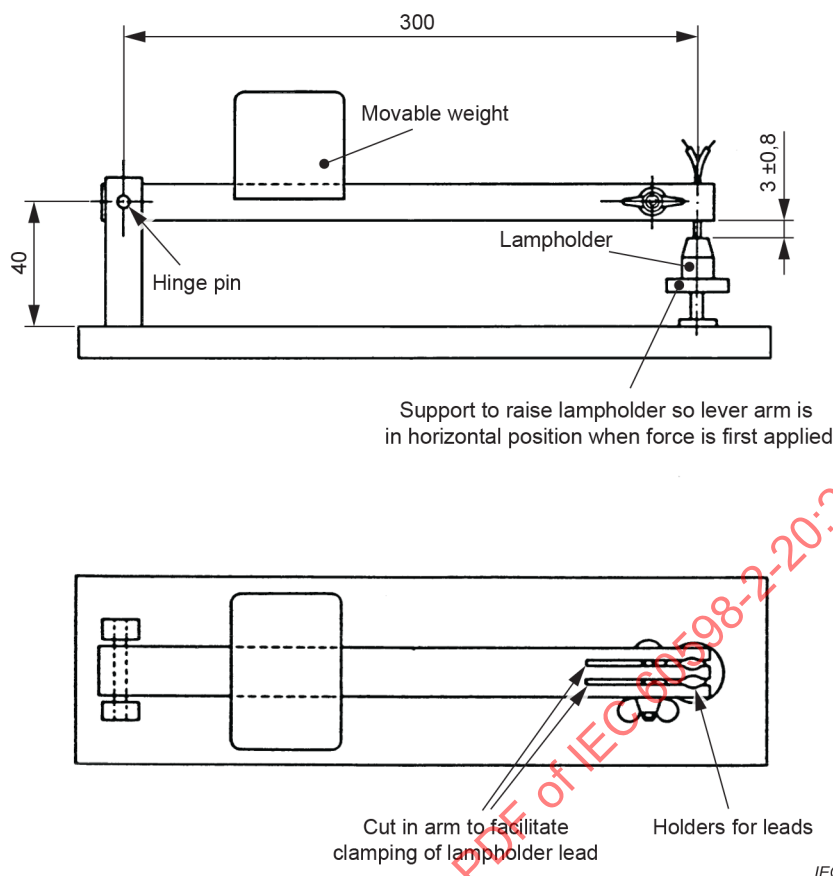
Example of test device suitable for checking security of lampholder contacts
